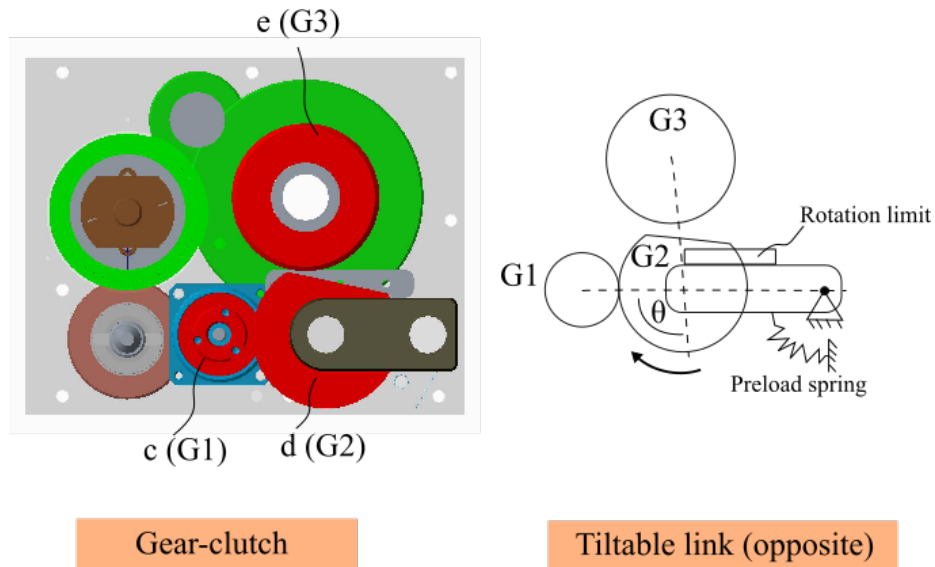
Gear-clutch mechanism of the joint prototype.
